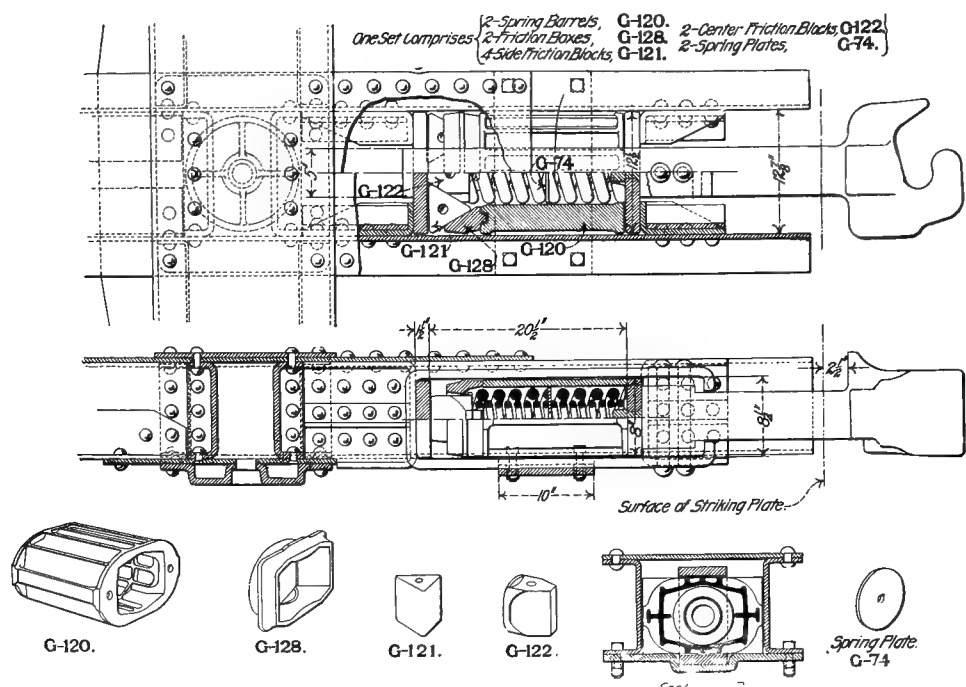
Sessions-Standard Friction Draft Gear, Type H, for Freight Cars with Pressed Steel Underframes. Standard Coupler Company.
